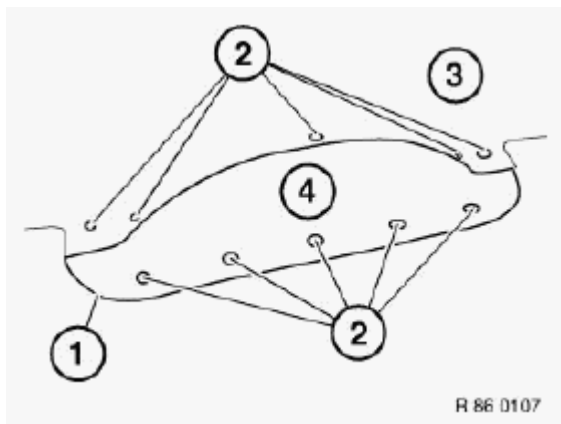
Identifying Sealing Compound, Raise Side Apron & Wheel Box
